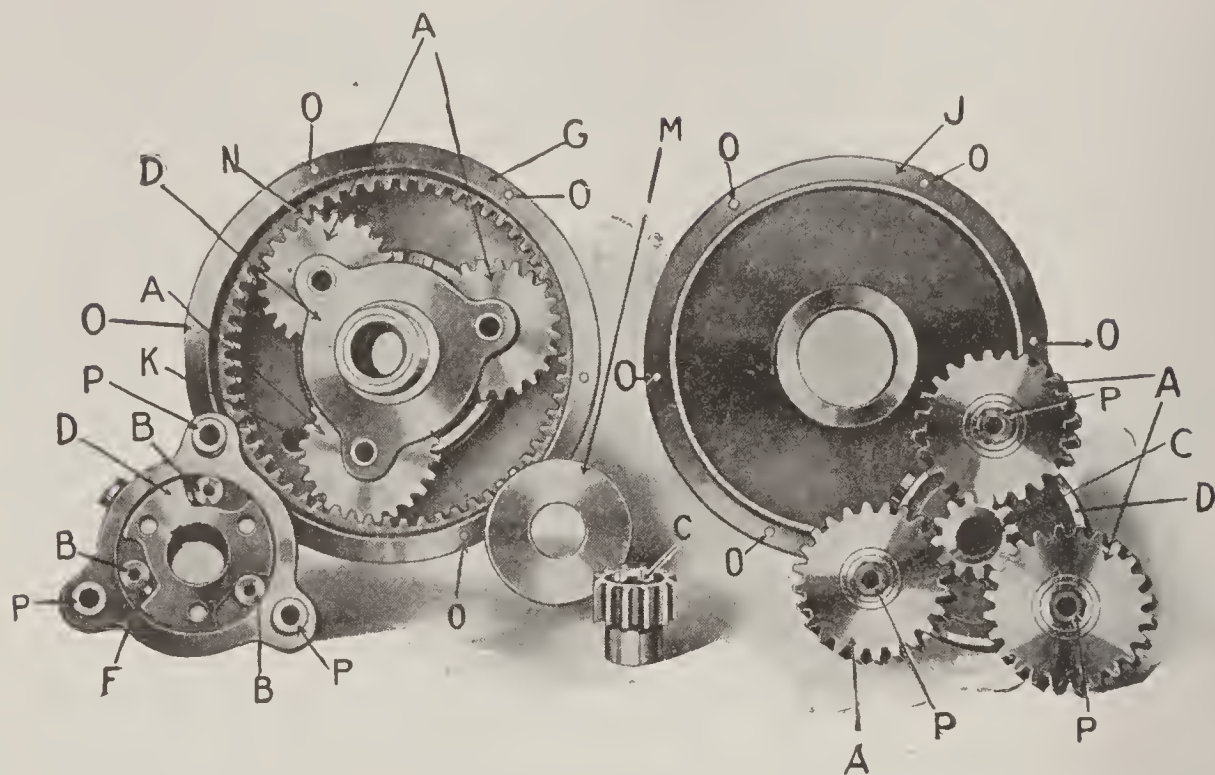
Exploded View of Planetary Gear Transmission. A—Planetary Pinion; B—Rolling Pawl; C—Center Pinion; D—Planetary Hub; E—Pawl Seat; F—Pawl Plunger; G—Internal Gear; H—Inside End Plate; J—Outside End Plate; K—Oil Plug; M—Sheet-Steel Disc
